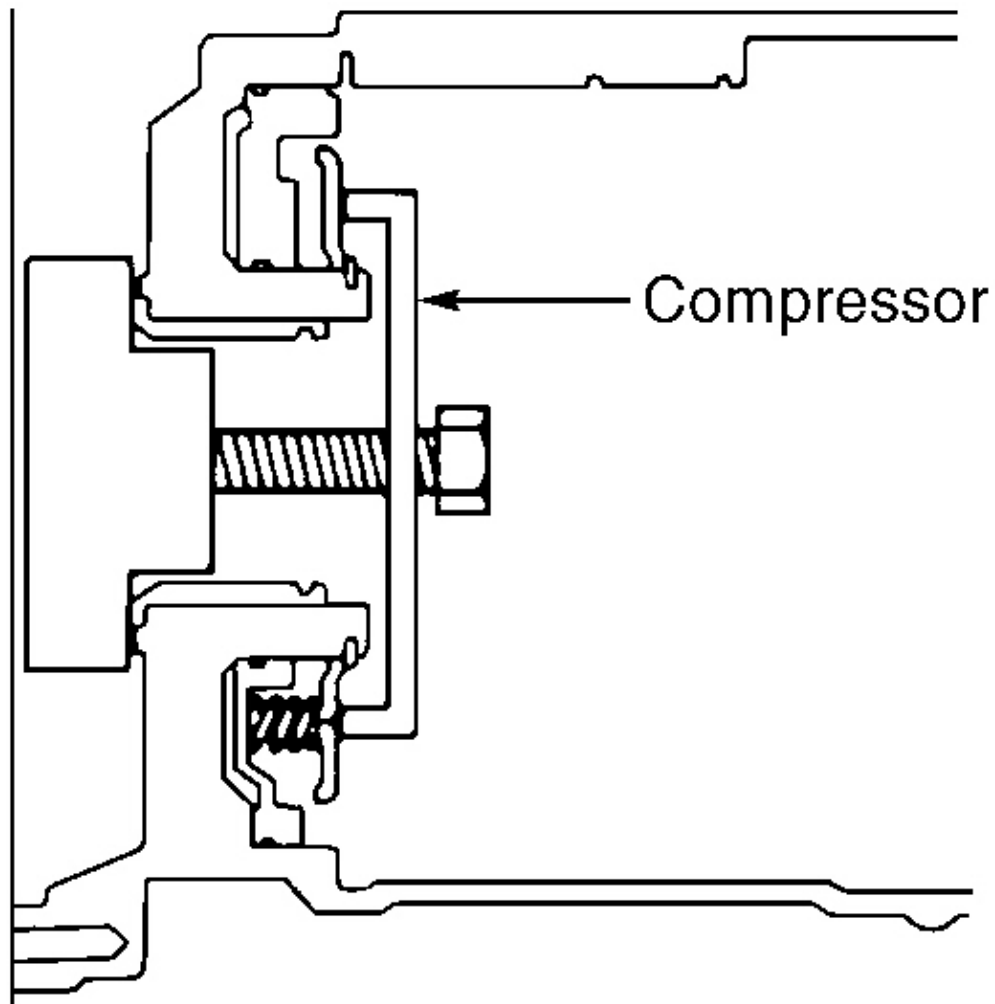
Checking Underdrive Brake & Clutch Piston Operation
